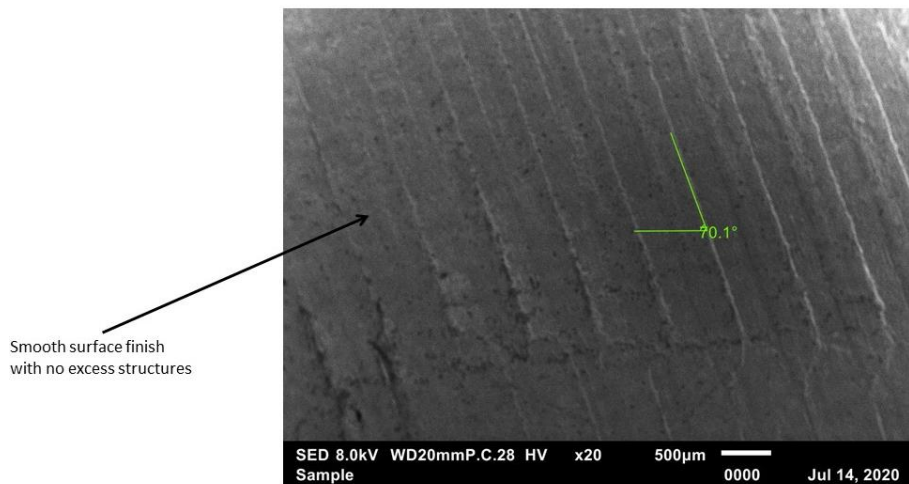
Top view of the printed part with 0.1 mm layer thickness under SEM microscopy [64].
